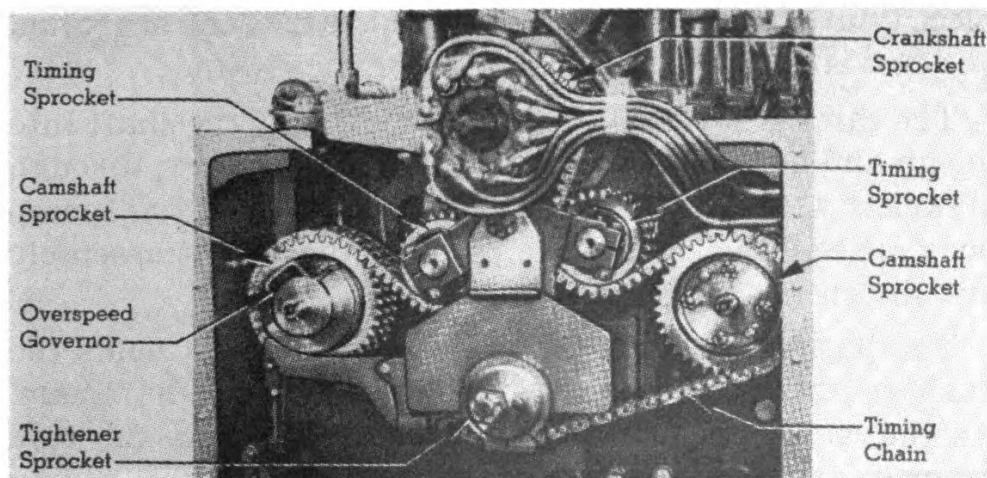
Camshaft drive and timing mechanism (FM 38D8 1/8).
